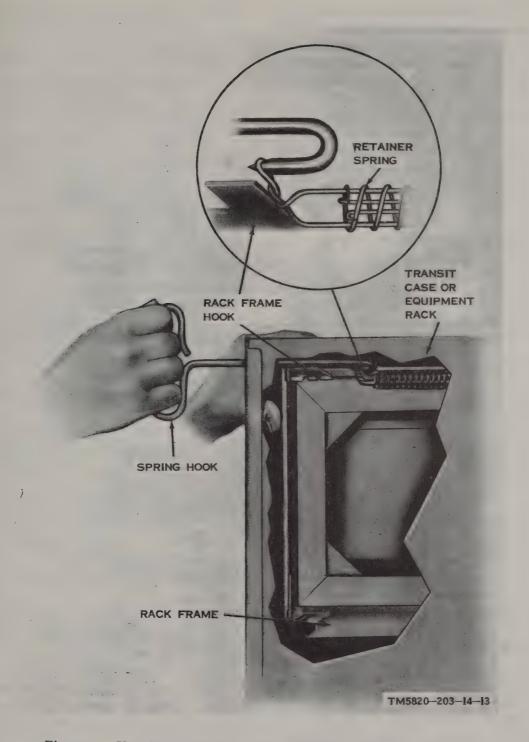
Use of spring hook to secure ruck frame in equipment rack.
